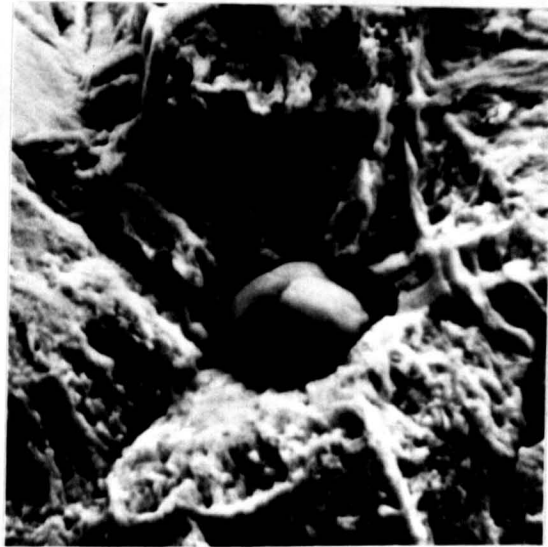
Scanning Electron Fractograph of a reverse-bend fatigue test-piece showing the presence of an angular non-metallic inclusion in the fracture piece.
